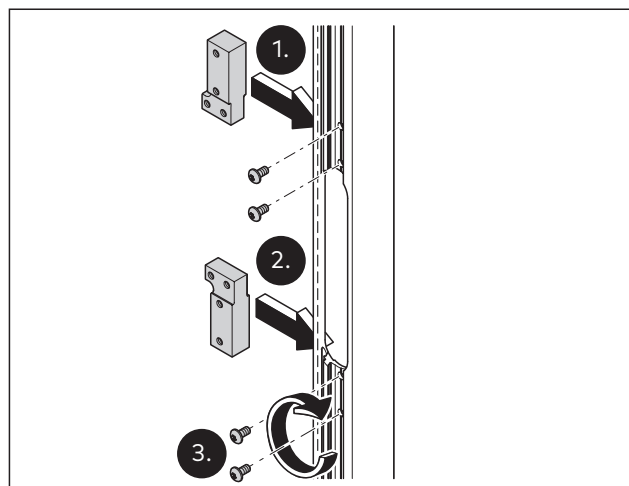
Attach the mounting bracket for the TECTUS hinge on the hinge side in the milled groove.
